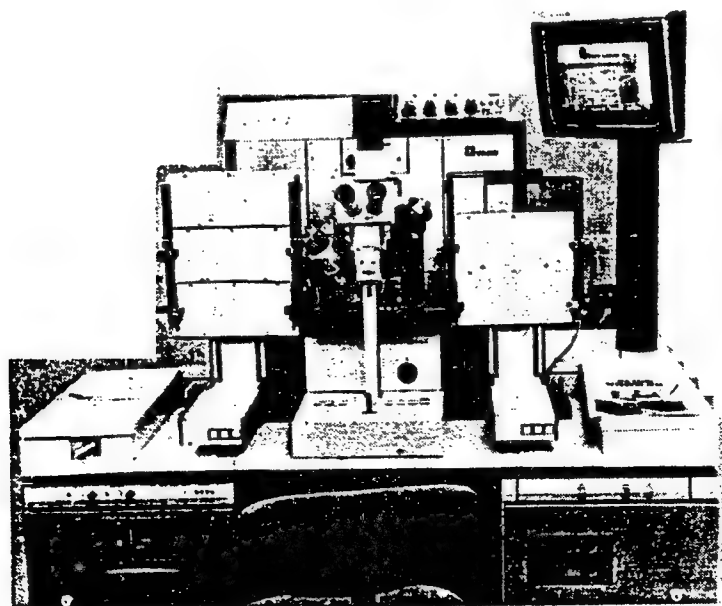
VADB 20 Fully Automatic Wire Bonding Machine, VEB Combine Carl Zeiss, Jena
